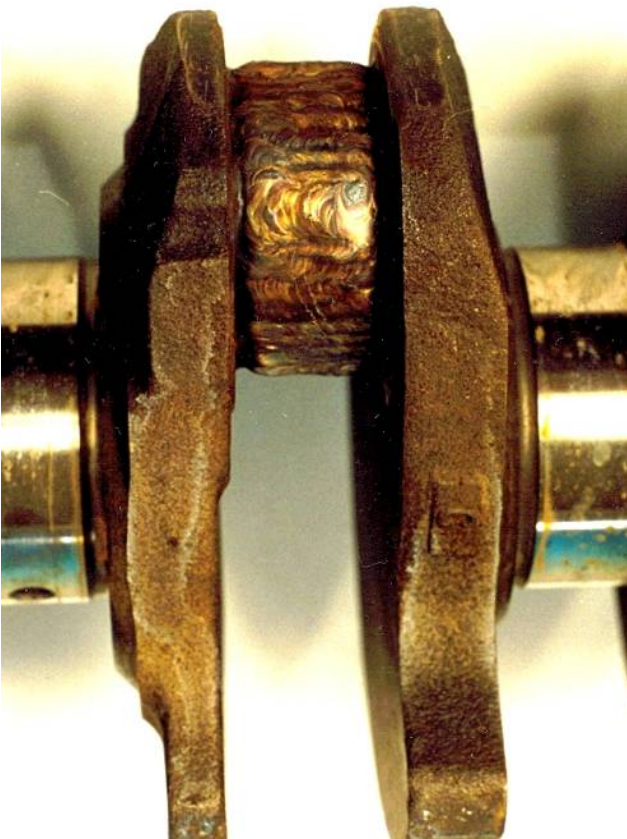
The appearance of the regenerated crankshaft of the motor ARAN
